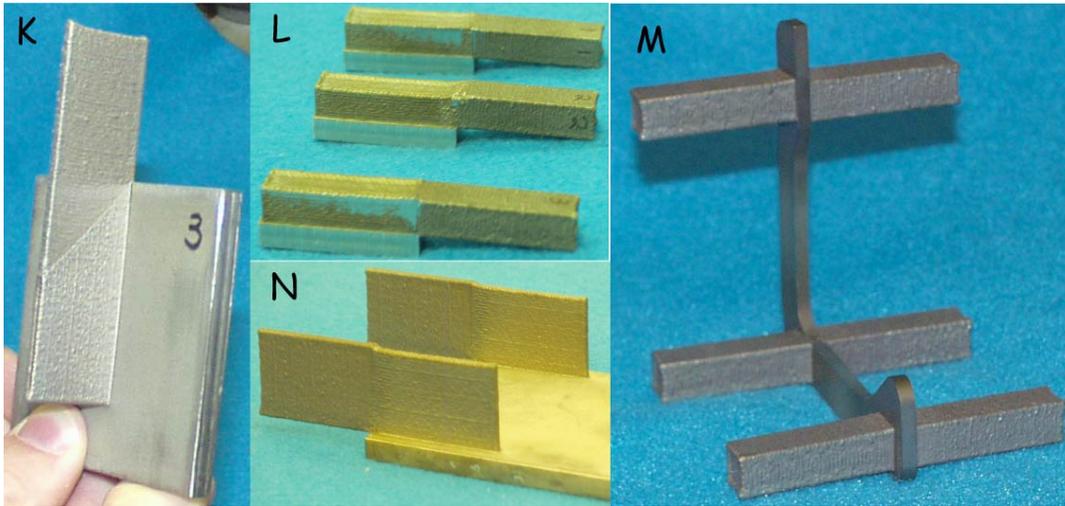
LENS Deposited Sample Types K-N for Machining Into Tensile Specimens.
